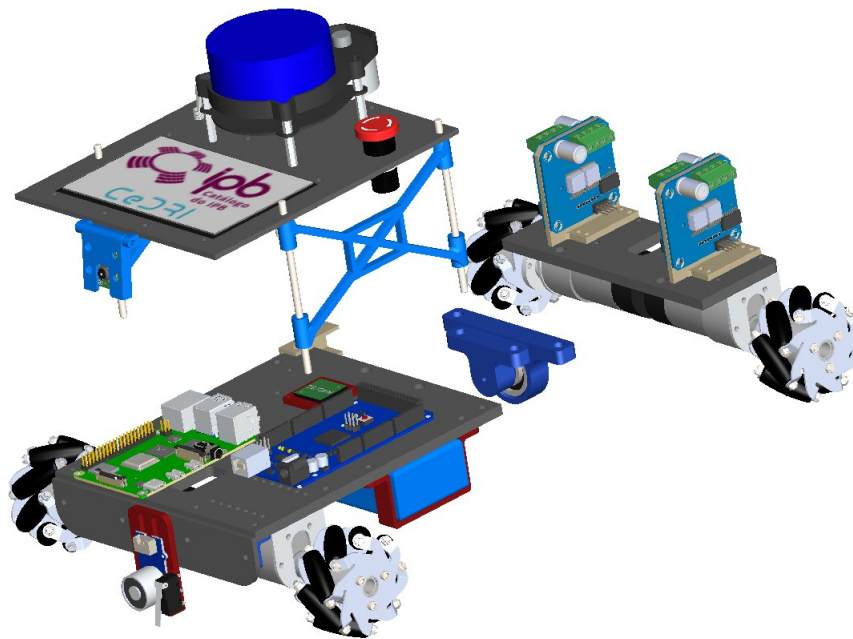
Exploded view of the main sub-assemblies of the robot.
